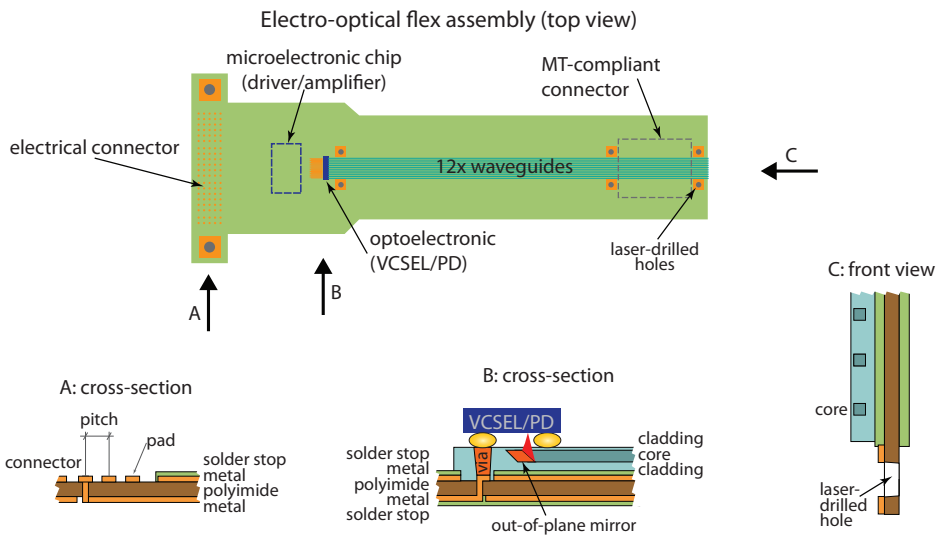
Design of the electro-optical flex assembly with a top view (*top*) of the complete assembly, a cross-section detail of the electrical connector part (*view A*) and the optoelectronic part (*view B*), and a front view of the optical connector area (*view C*).
